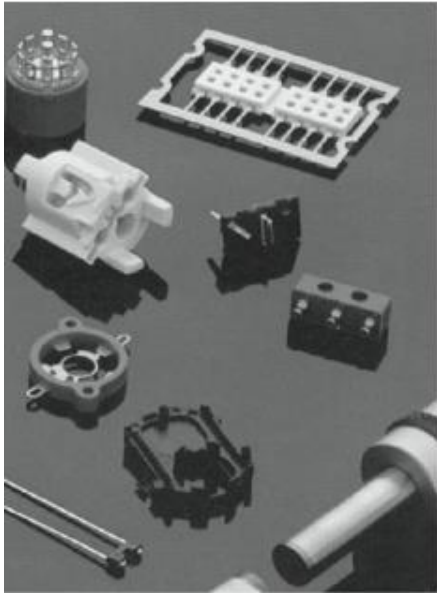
Typical metal inserts used to provide threaded cavities, holes, and alignment pins in plastic parts.
